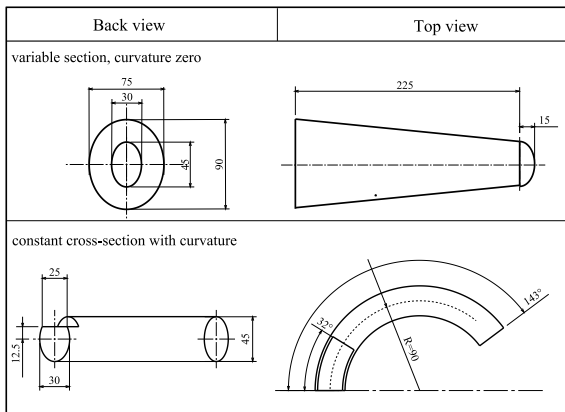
2-D dimensional sketch from CAD drawing C_1 is the first model and C_2 is the next one.
